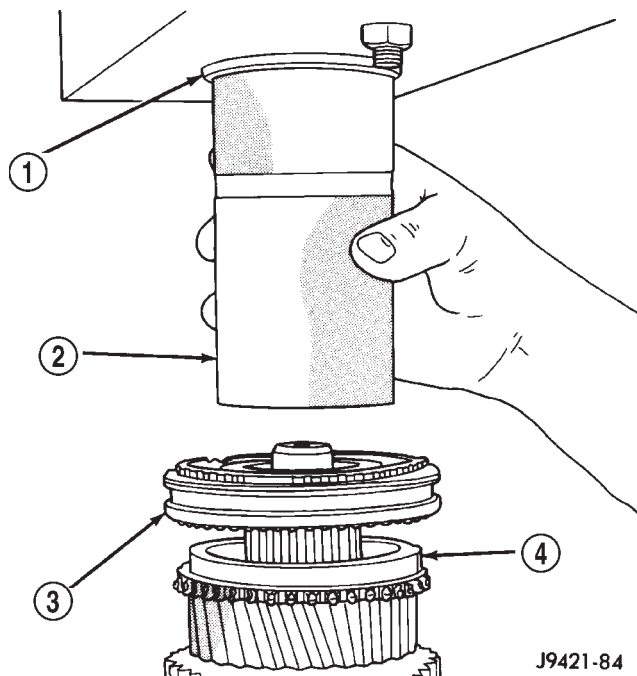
Pressing 3-4 Synchro Assembly On Output Shaft
